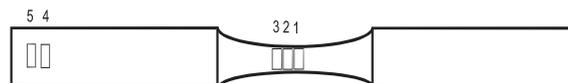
Scheme of cutting specimens for hydrogen testing from a large specimen non-broken under fatigue test
